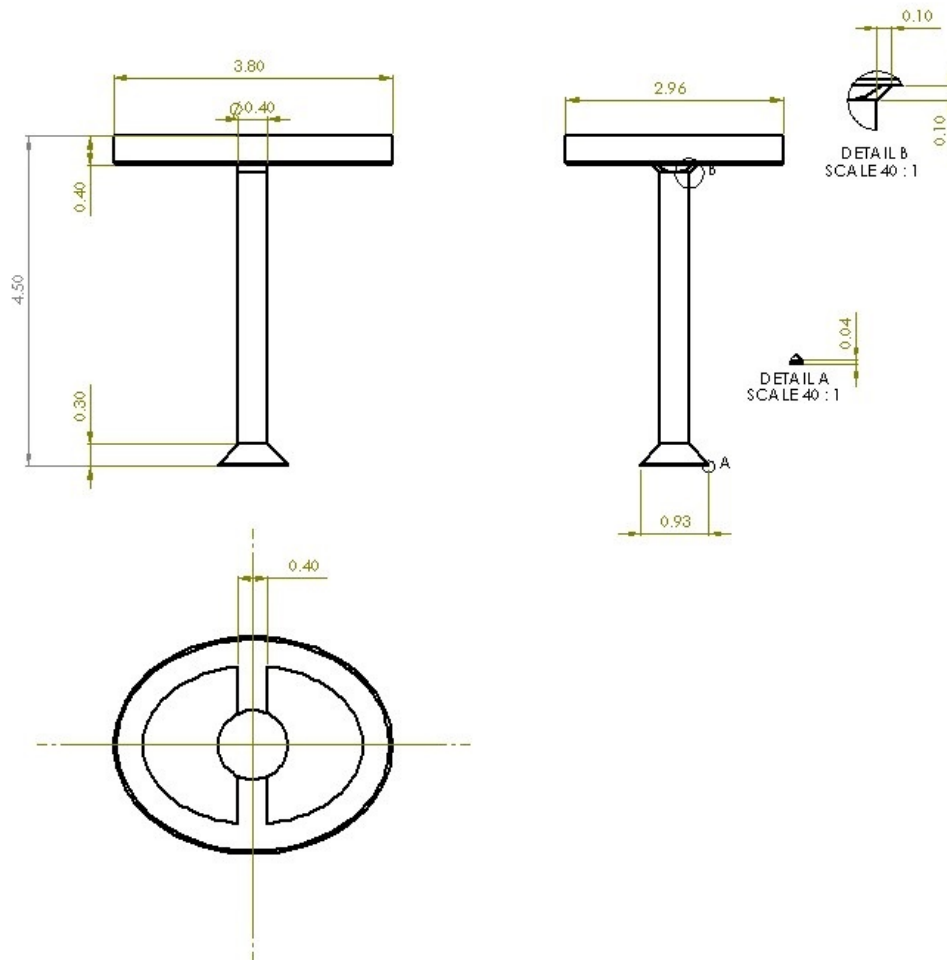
CAD drawing of Concept 1: additive manufacturing (SLM)
